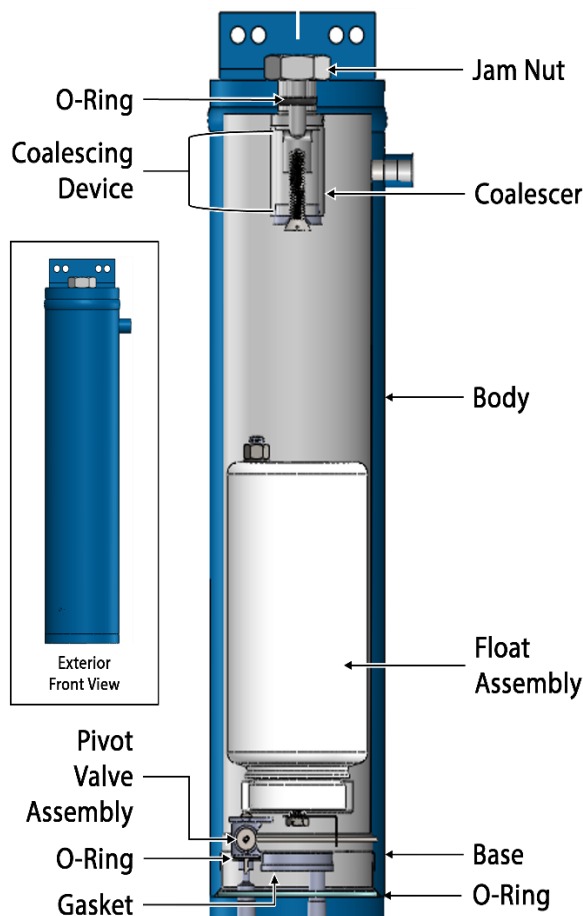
Welker® ALD-1 Automatic Liquid Dump – Interior Front View
